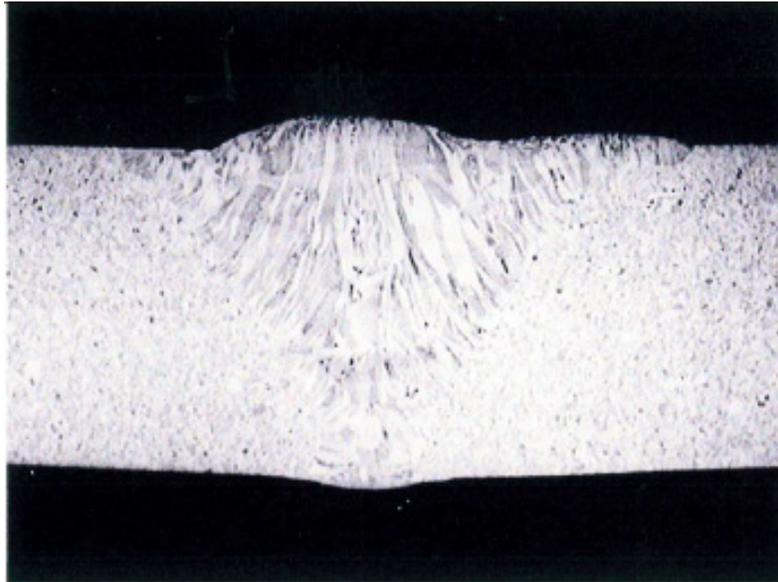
Macroscopic picture of the weld⁵⁷
